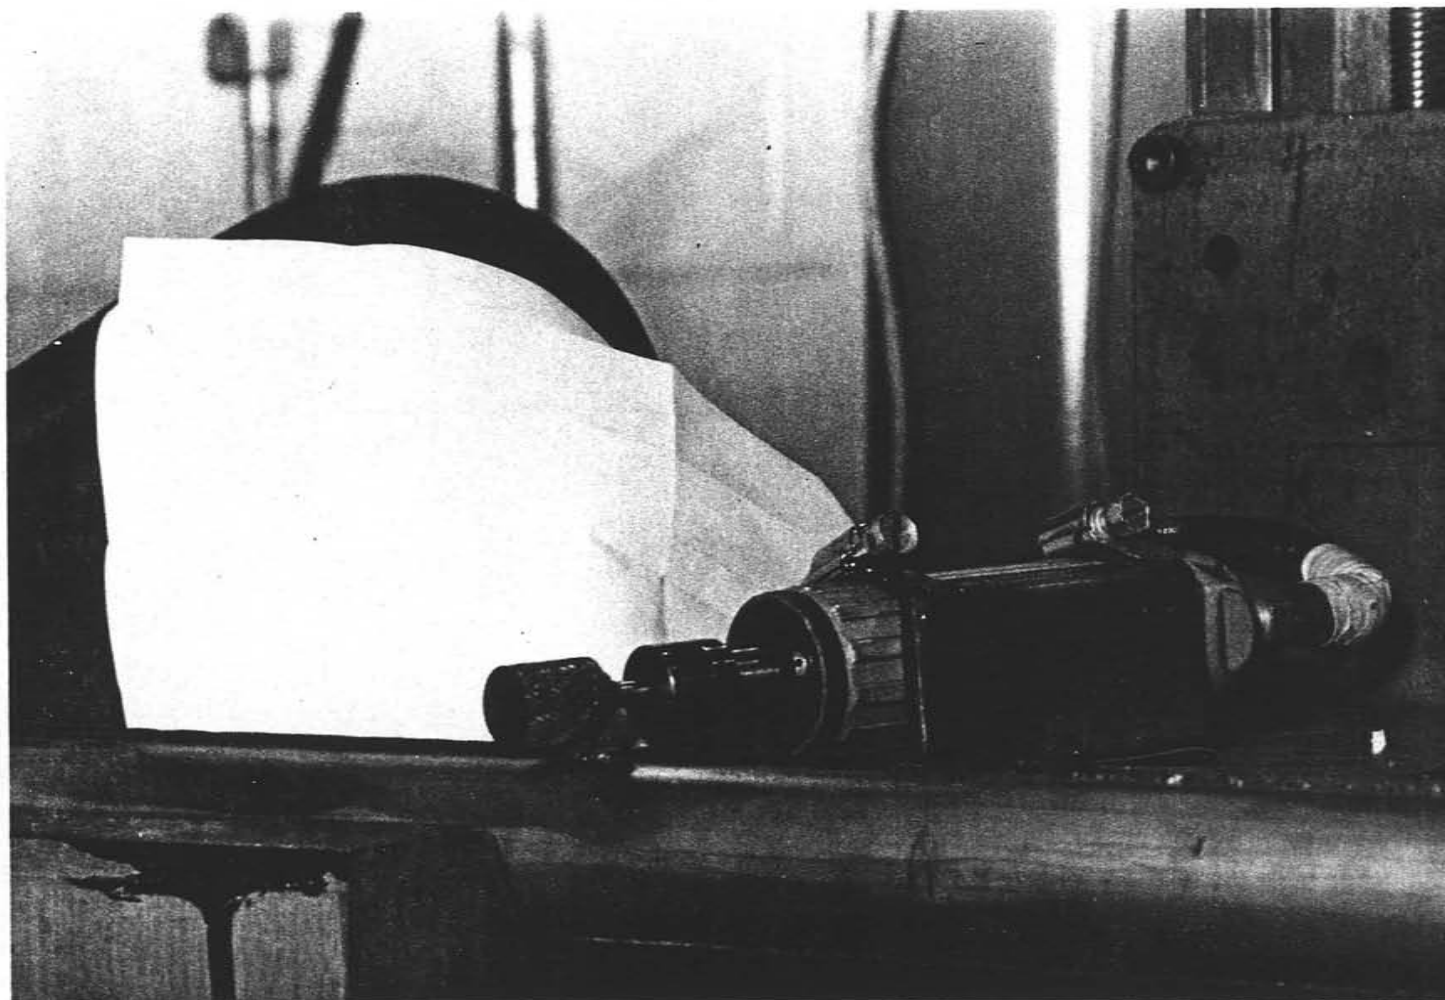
WELD DEPOSIT SURFACE CONDITIONING
